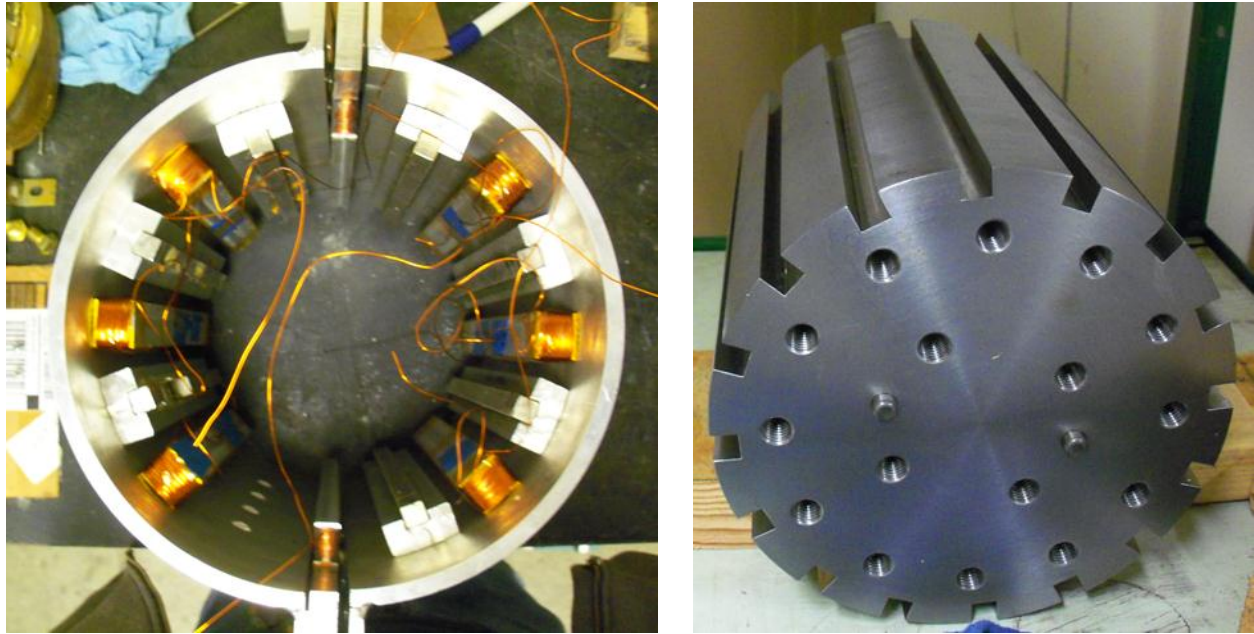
Compulsator Stator (Left) and Rotor (Right) Views, note the armature windings have not been included on the rotor yet.
